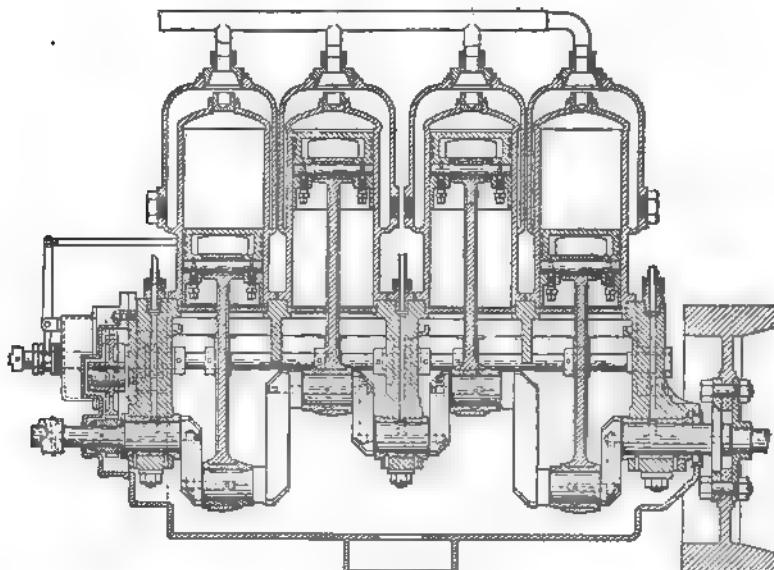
A Typical Four-cylinder Engine (Pierce), showing position of cranks and working parts, including secondary shafts.
